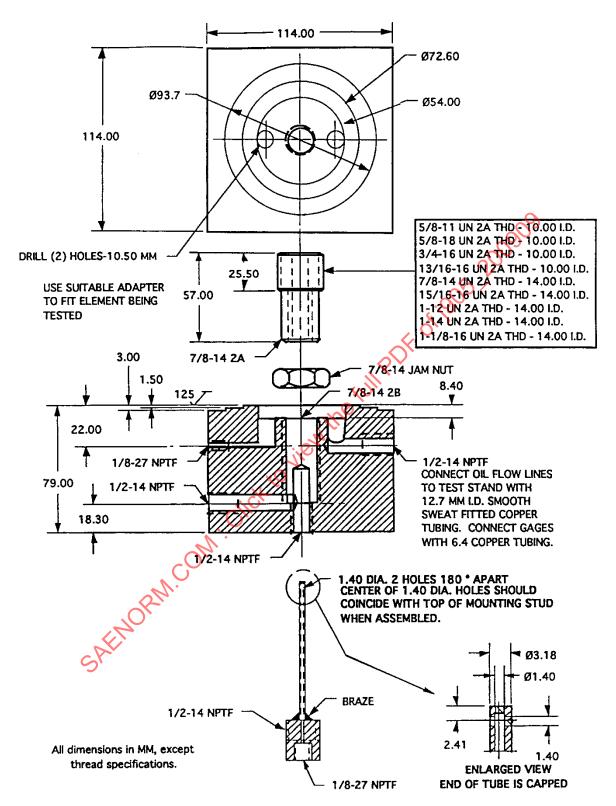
UNIVERSAL TEST FIXTURE FOR SPIN-ON ELEMENTS
